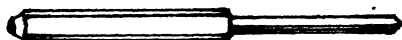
“PHILPLUG” SOLID FORGED JUMPER
